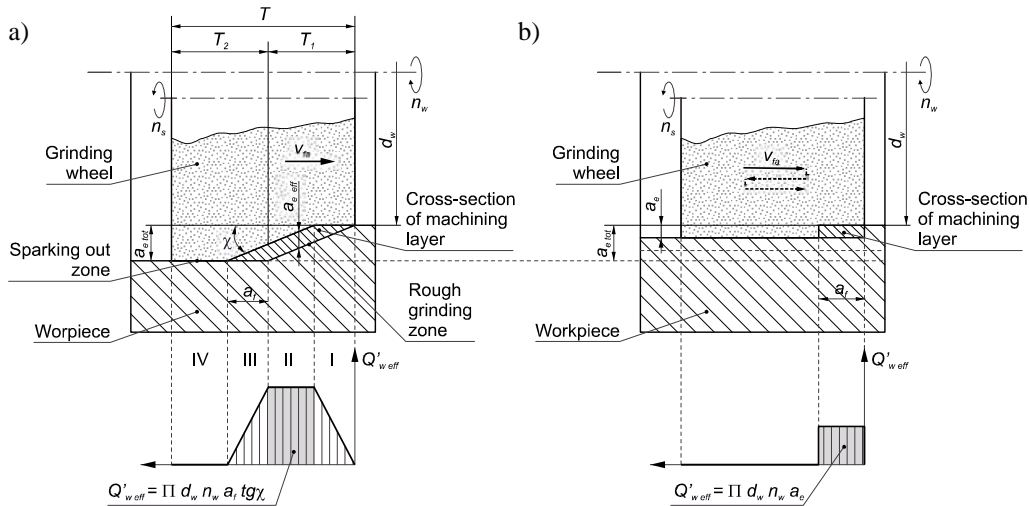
Comparison of grinding wheel load in single-pass internal cylindrical grinding using grinding wheel with conic chamfer (a) and conventional multi-pass grinding (b) [4–6]
